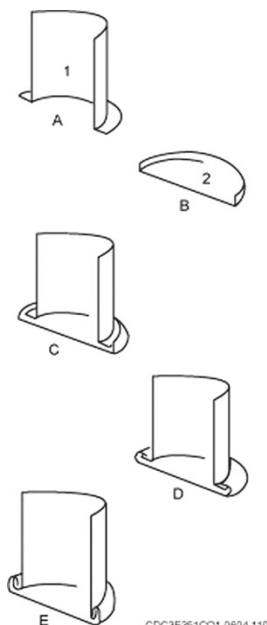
Making a bottom double seam for cylindrical shaped components.
